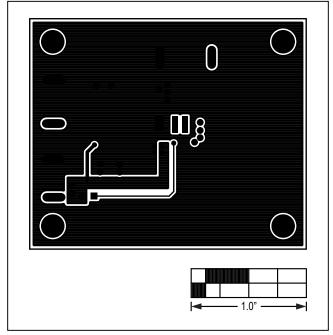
MAX17515 EV Kit PCB Layout—PGND Layer 2
